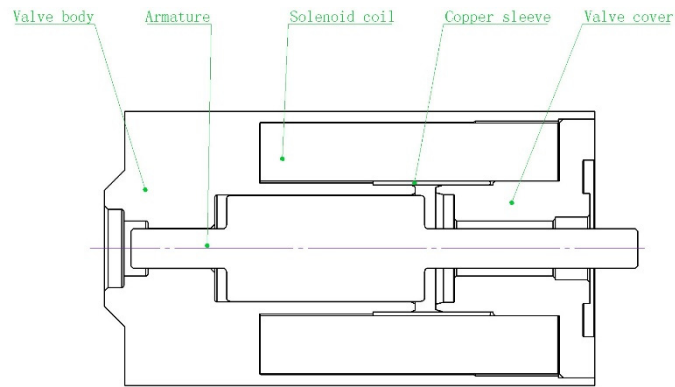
3D sectional view of the solenoid valve with main components: valve body, moving armature, solenoid coil, copper sleeve, and valve cover
